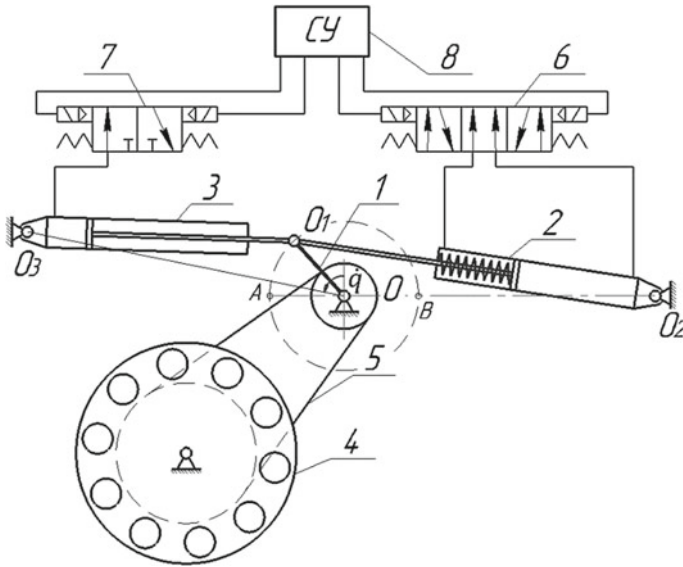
Diagram of a stepper drive with energy recovery and the use of pneumatic drives. 1—rotary link, 2—pneumatic cylinder with return springs, 3—pneumatic cylinder, 4—rotary table, 5—toothed belt drive, 6—pneumatic distributor 5/3, 7—pneumatic distributor 3/2, 8—control system
